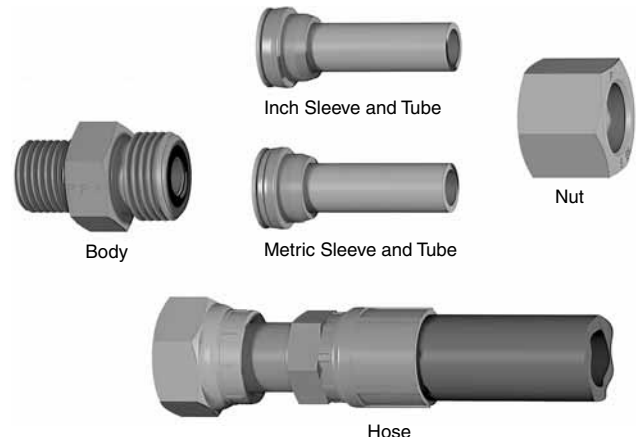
Seal-Lok Works with Inch or Metric Tube and Hose
